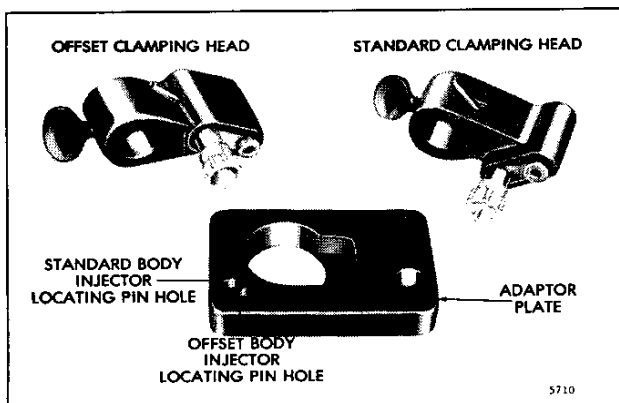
Injector Tester J 23010-A Clamping Heads
